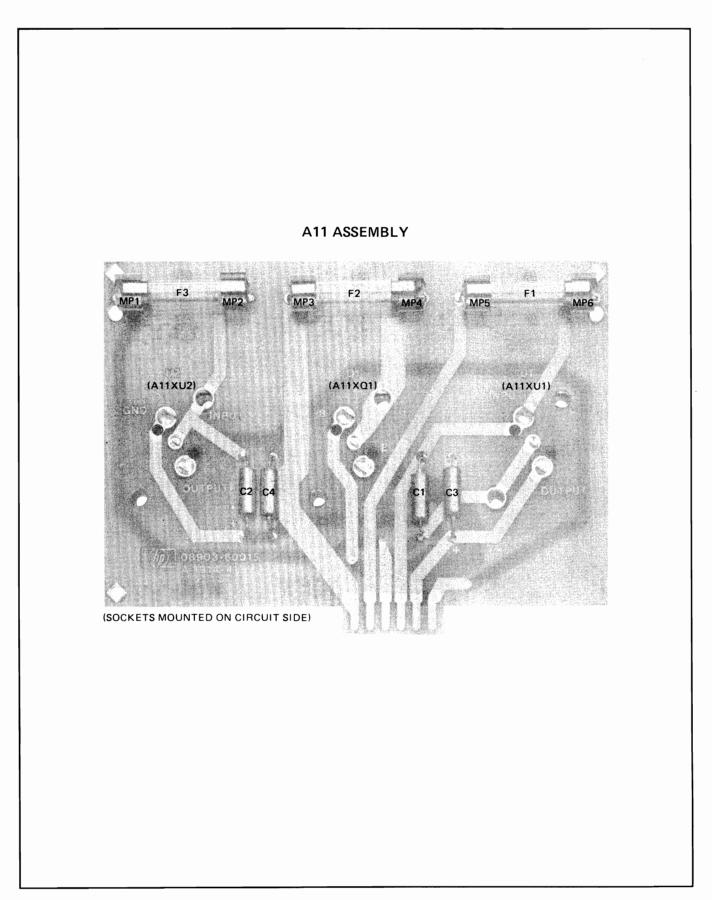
A11 Series Regulator Socket Assembly Component Locations
